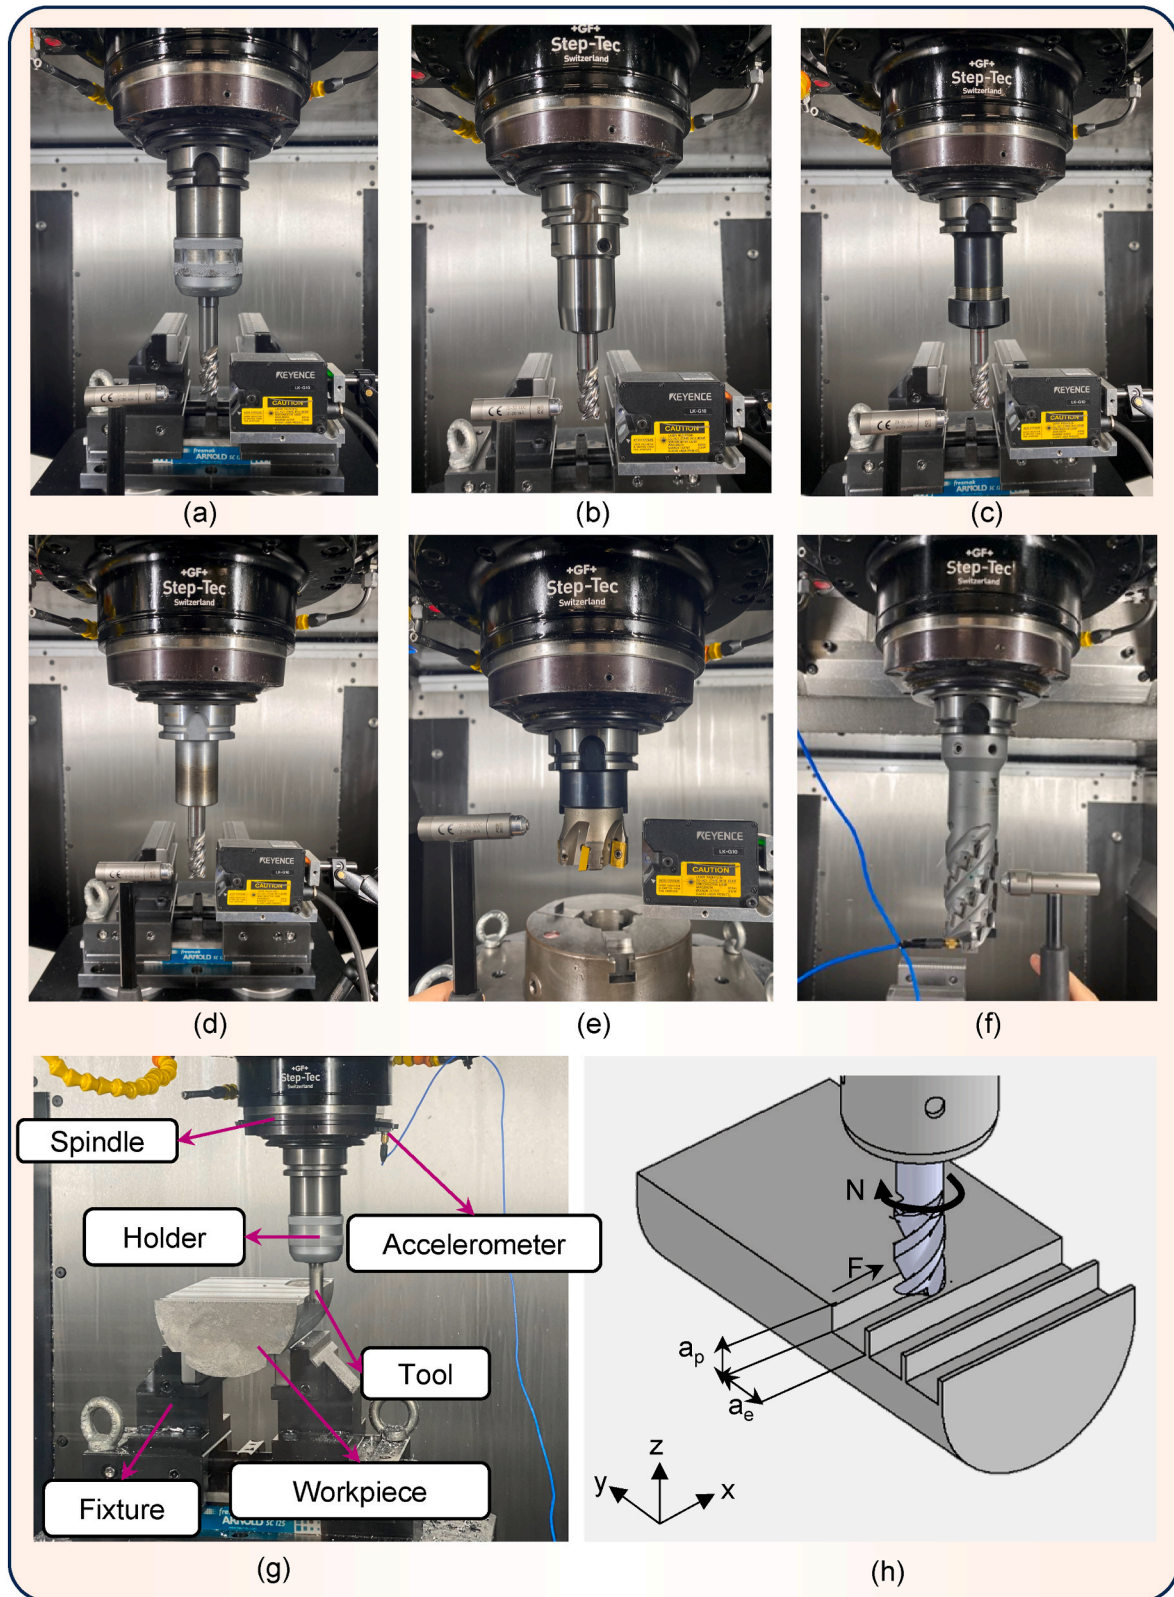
Experimental validation setups: (a–d) Tool T3 mounted in holders 3 to 6 (H3–H6), respectively; (e) Shell-end mill (T4); (f) Monoblock tool (T5); (g) Complete machining setup with labelled components; (h) Schematic representation of cutting directions and force components.
